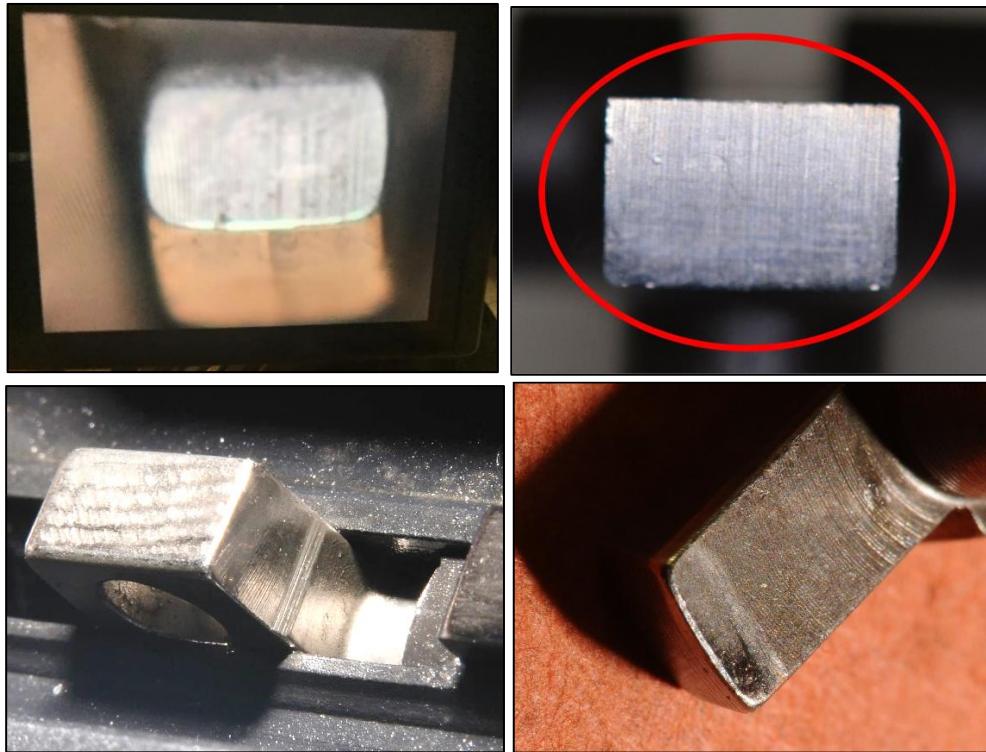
Other firearms - striker foot (top left), sear face (top right), striker foot (lower left), and striker foot (lower right) all with machined flat surfaces
